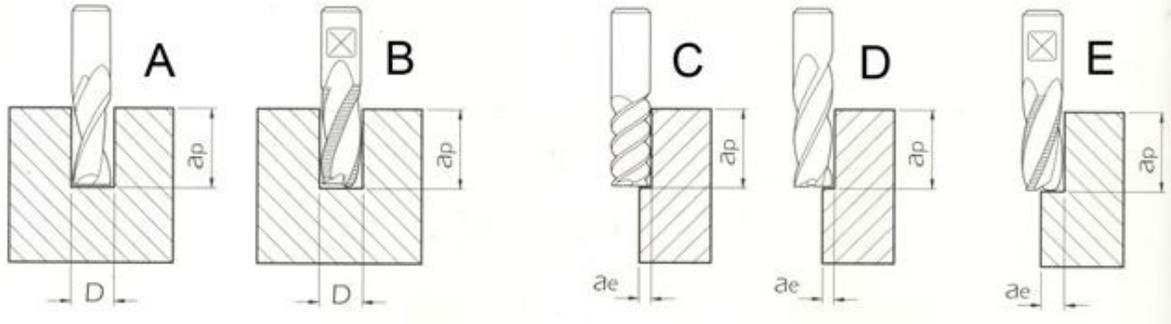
b- Cutting edges of “Piraña” end mills cutter
